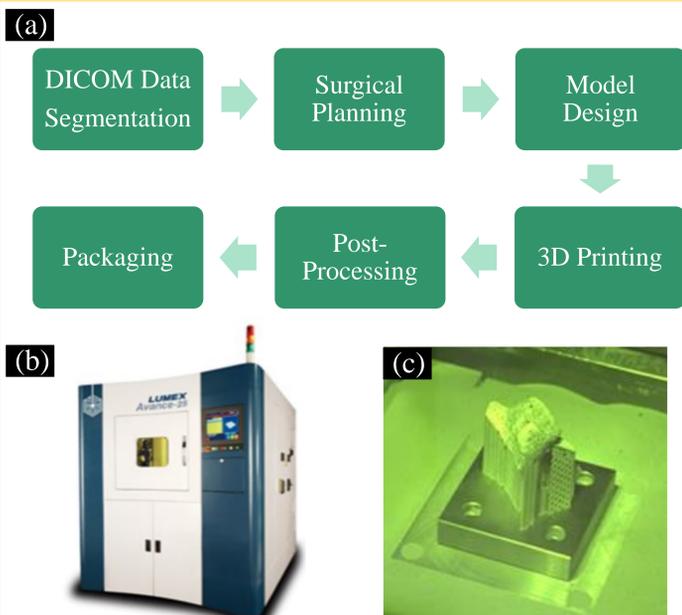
Design and manufacture of HTO surgical jigs: (a) Workflow of the production of patient-specific surgical jigs by additive manufacturing; (b) The Matsuura LUMEX Avance-25 printer used in manufacture process; (c) 3D-printed jig before post-processing.
